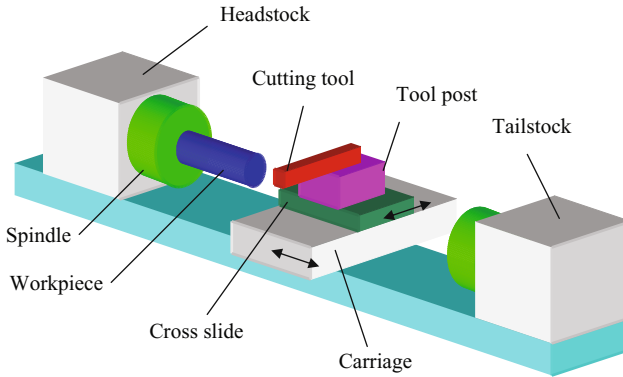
Schematic of manual lathe. The workpiece is clamped in the rotating spindle, but may also be supported at its free end using the tailstock. The cutting tool, which is clamped to the tool post, is moved relative to the workpiece by adjusting the positions of the carriage (axial direction) and cross slide (radial direction)
